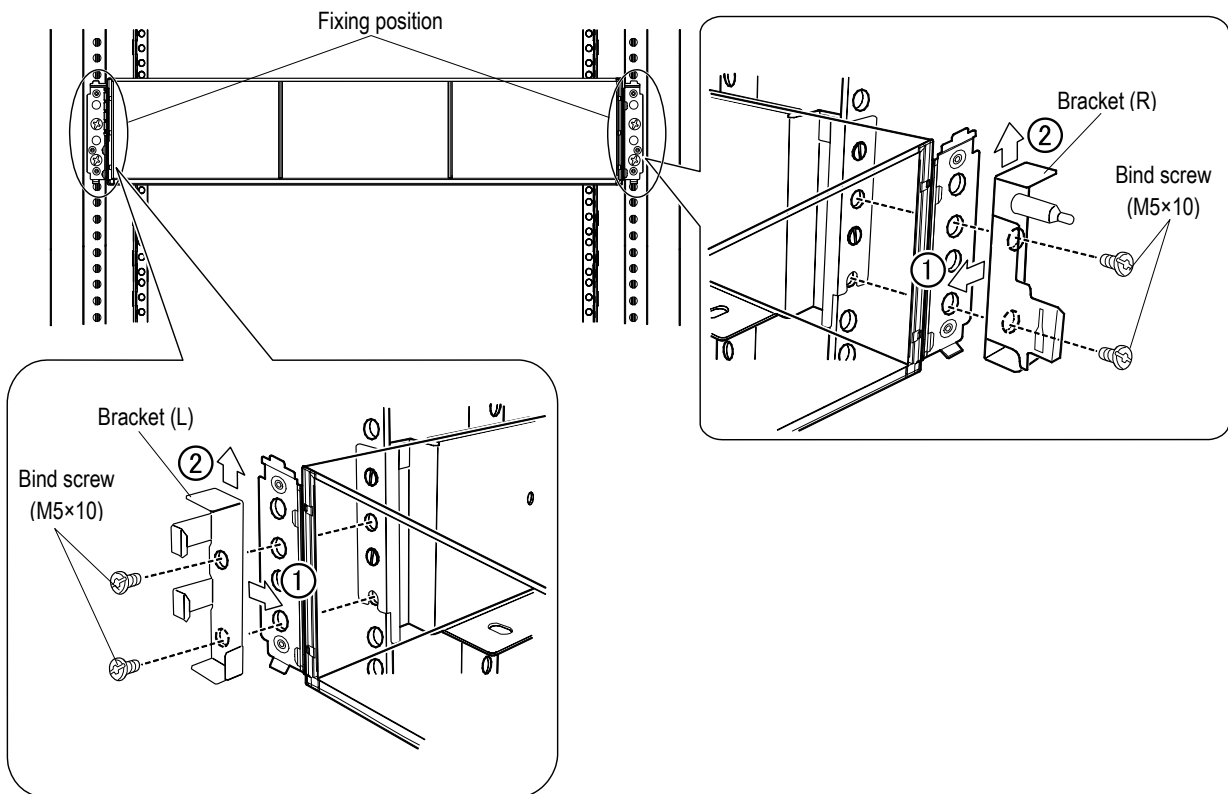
Fixing the Front Side of the Array (Controller Box (2U), Drive Box (2U))
